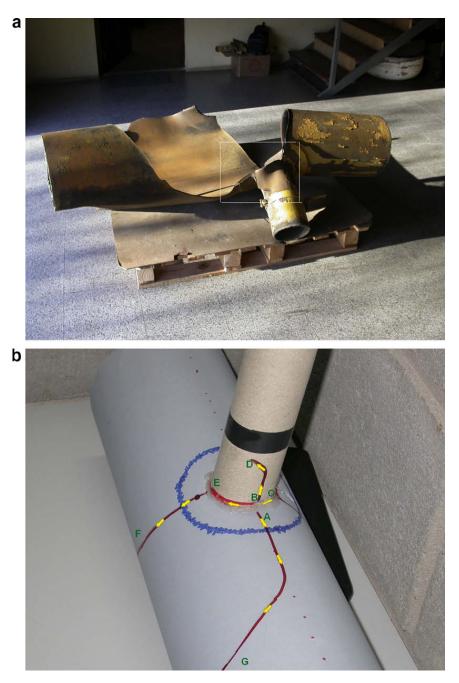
(a) Section 12 of the collector, fractured into two sections. (b) Fracture initiation.
